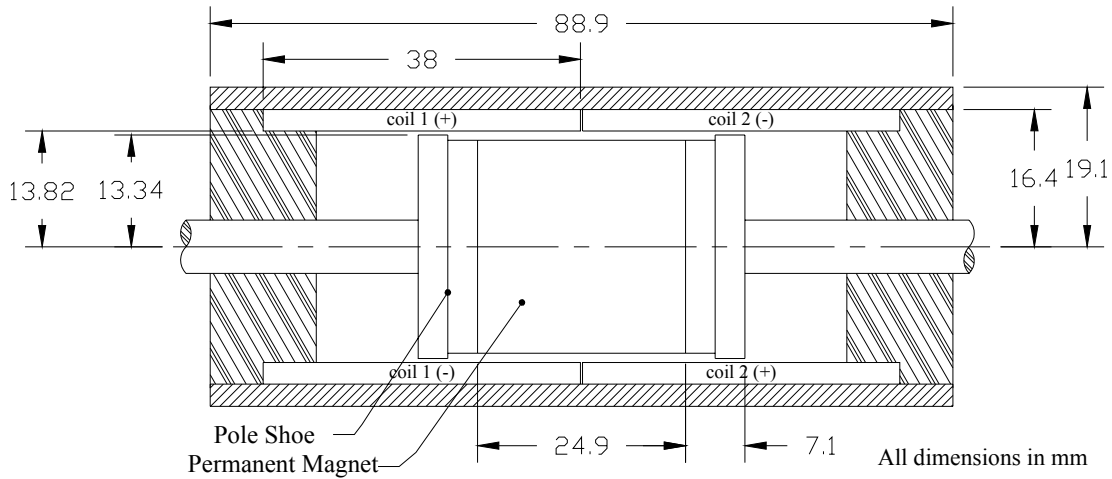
Baldor™ Linear Motor Dimensioned Drawing.
